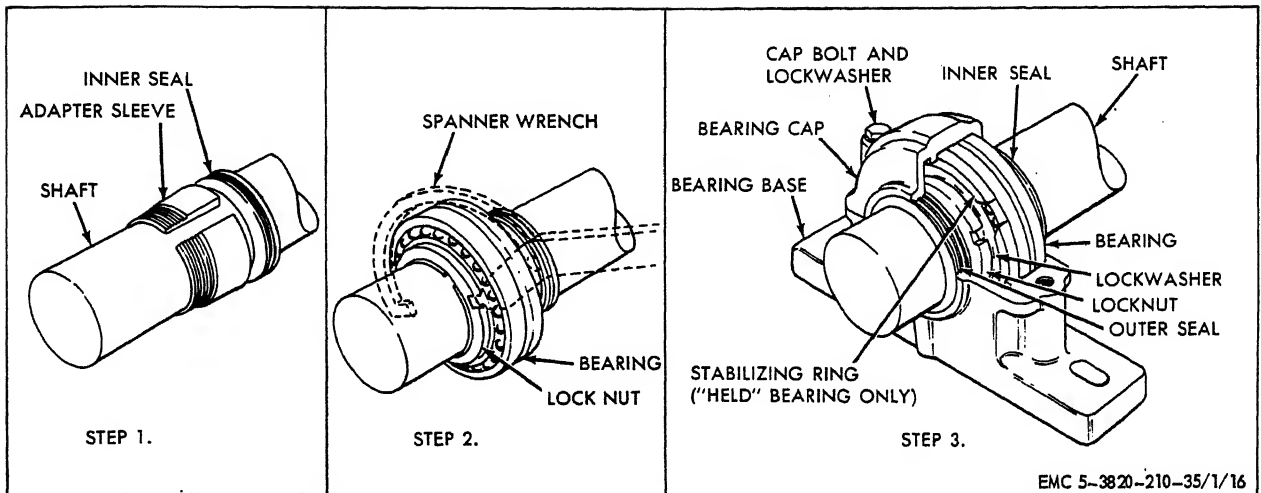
Scrubber trunnion roller shaft bearing, removal, disassembly, reassembly, and installation.
